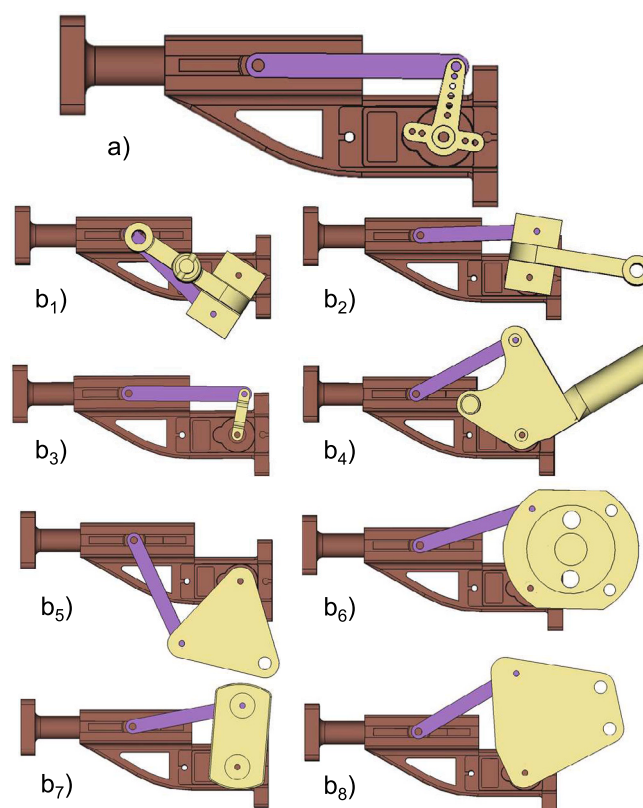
Generated assemblies with FillBetweenTwoParts strategy using purple and brown parts as inputs. The original assembly model (a) is automatically assembled to the retrieved parts whose dimensions have been modified to fit ( $b_1$  to  $b_8$ ).
